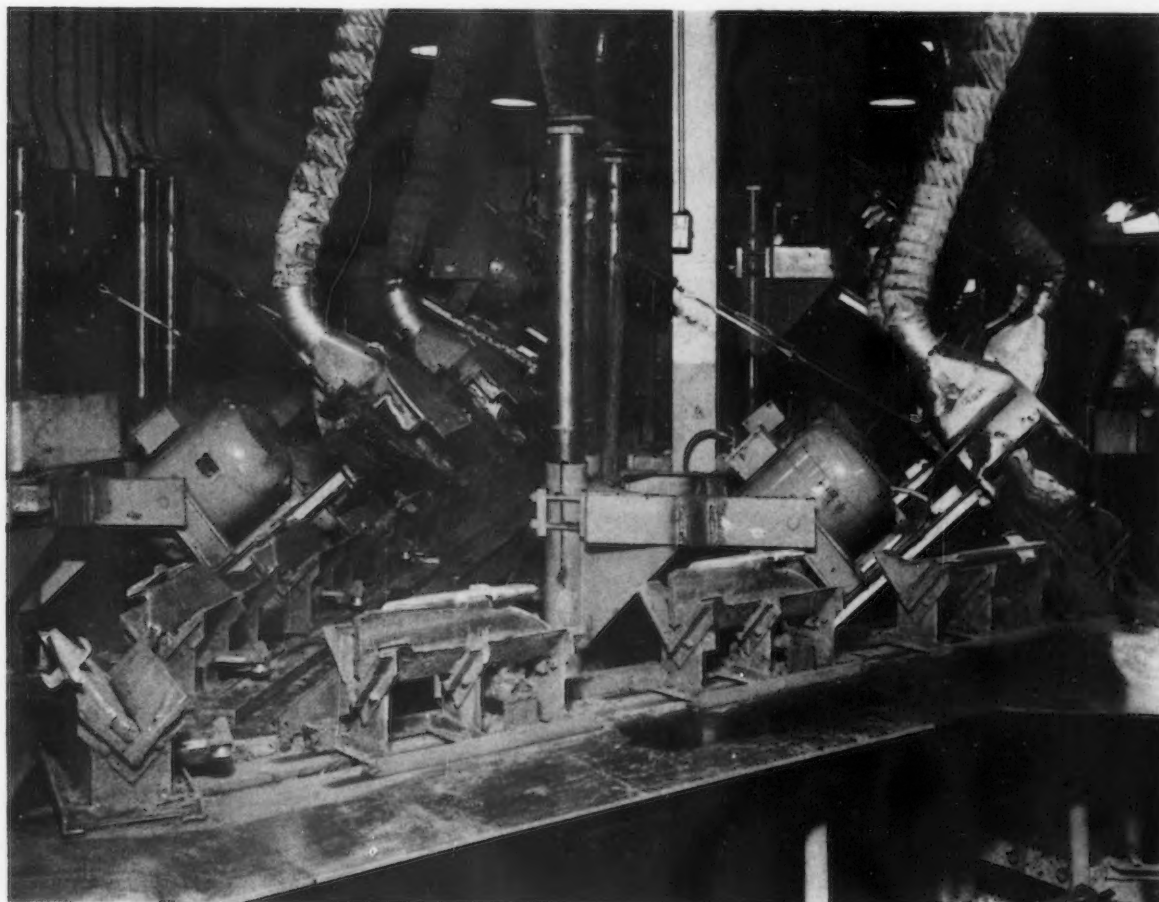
Fixture holds and turns two Pontiac castings for buffing under an inclined wheel.
